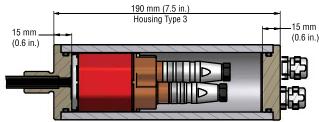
Model RS Rod-style sensor dimension reference (shown with *Type 3* housing)
